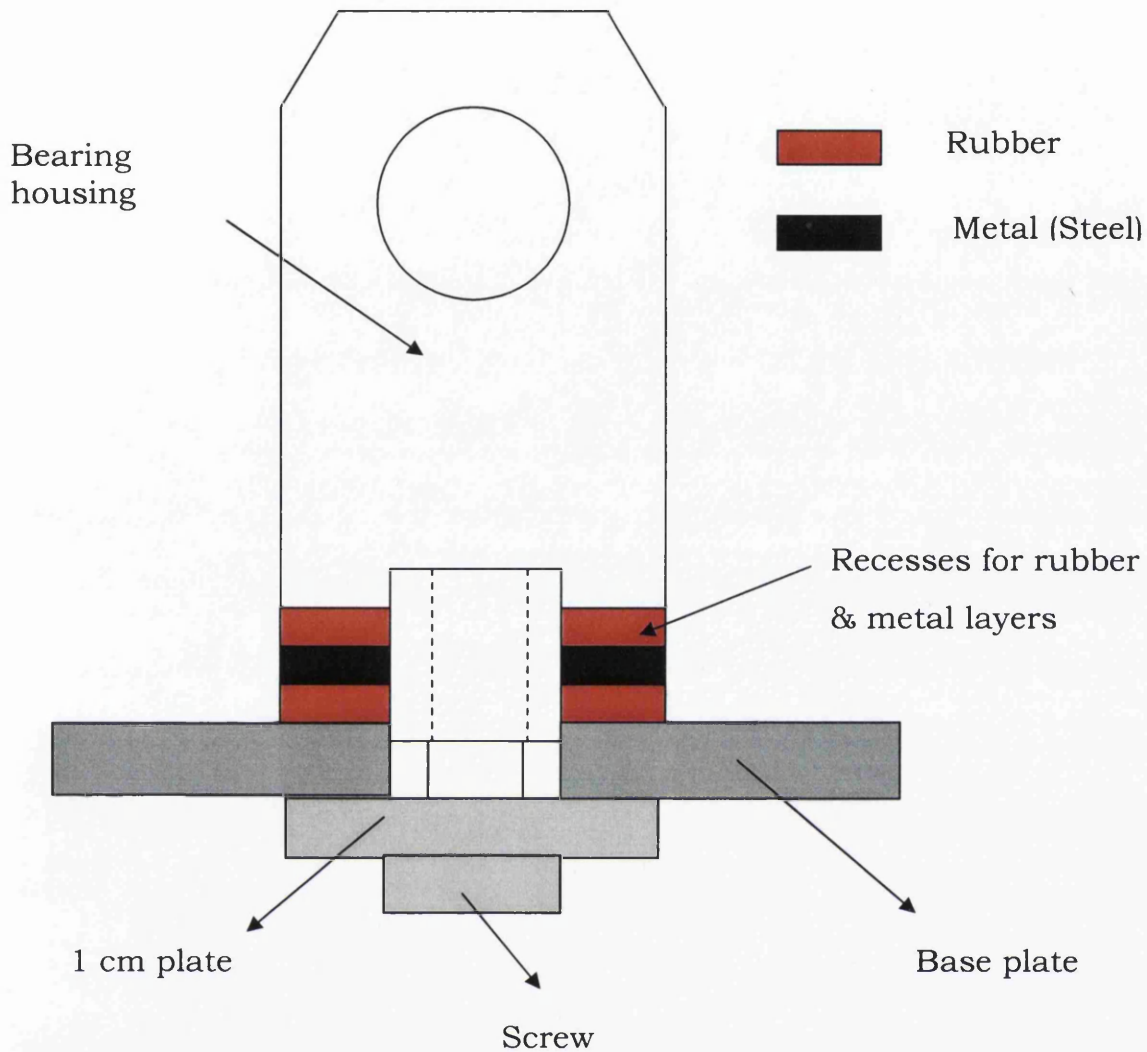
6 Schematic of Bearing housing (not to scale)
